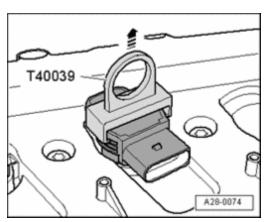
Removing Bolts On Left Cylinder Head, Disconnecting Electrical Harness Connectors & Removing Ignition Coils
